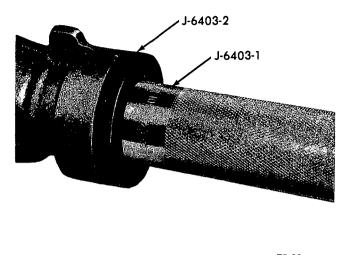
B-25 - Installing Rear Bearing Retainer Bushing
